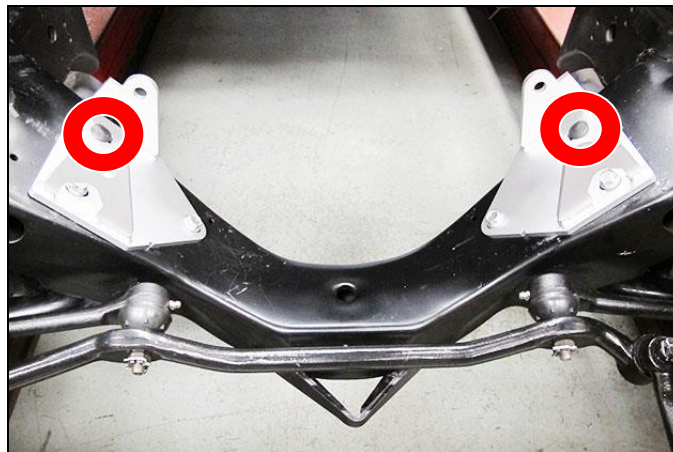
Install carriage bolts into top rear hole of each bracket when installing 71221009HKR rear biased brackets.
